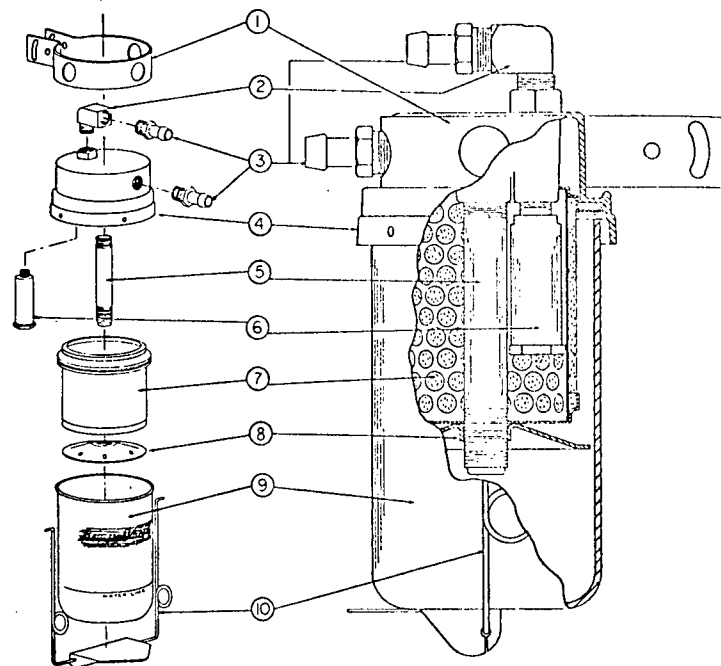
DEVICE 427 CLOSED BLOWBY CONTROL SYSTEM FILTER-VALVE ASSEMBLY DETAILS
